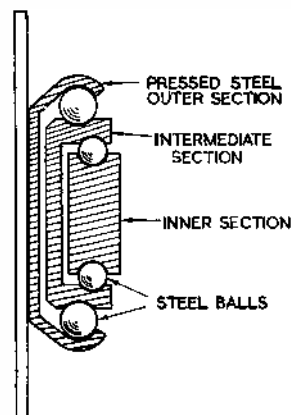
Sectional view showing the construction of the Admiralty type mounting
